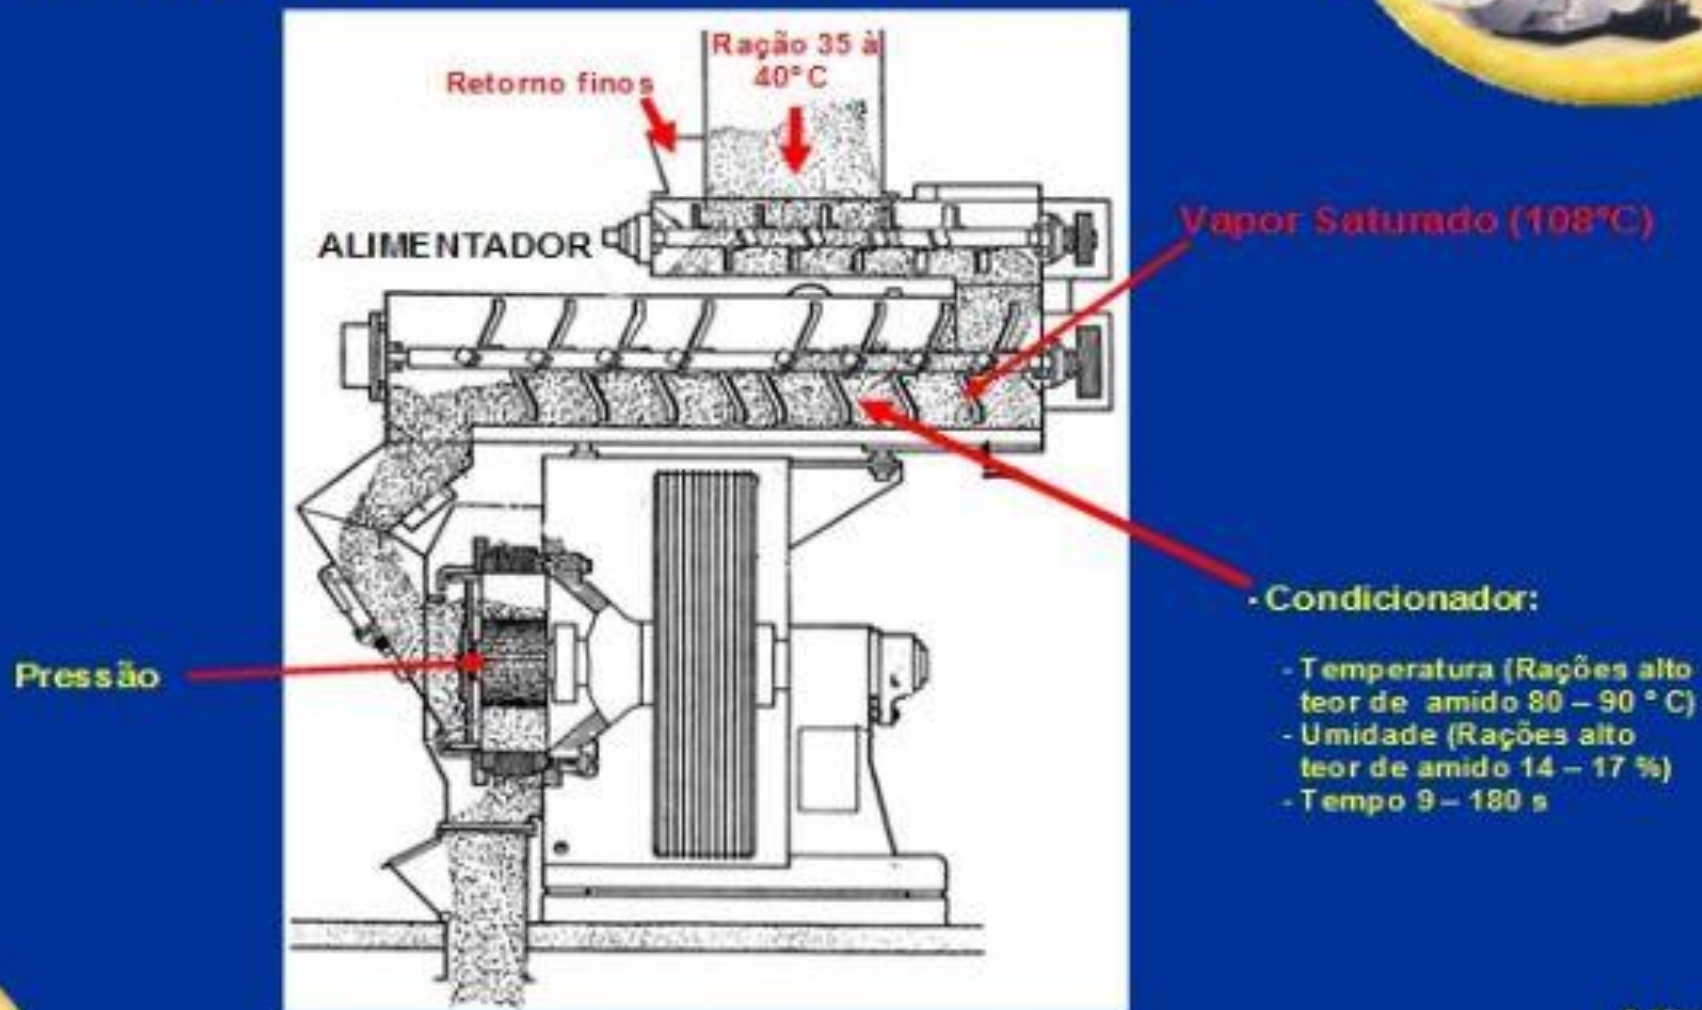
Typical Die and Roller Assembly Used for Producing Hard Pellets
